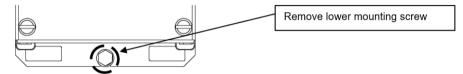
Remove lower mounting screw for Wall mount variants only
